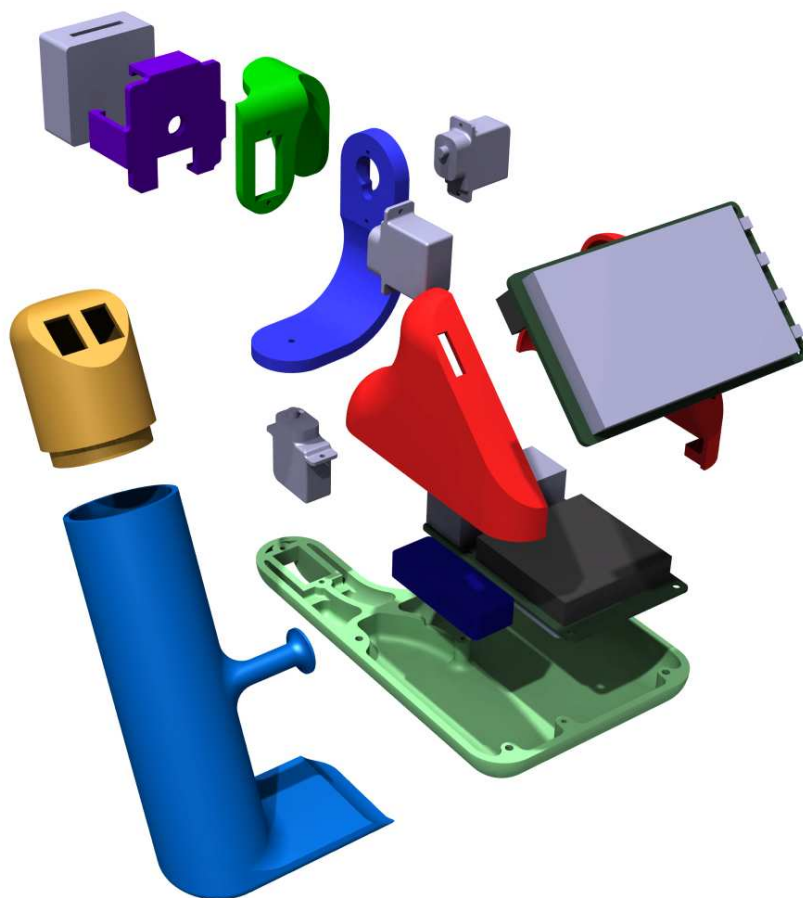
Exploded view of the 3D model of the demonstrator.
